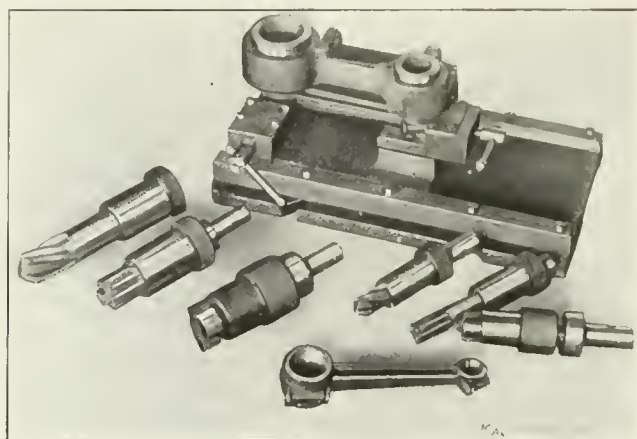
Drilling, Reaming and Facing Jig and the Tools used for Machining the Connecting-rods
